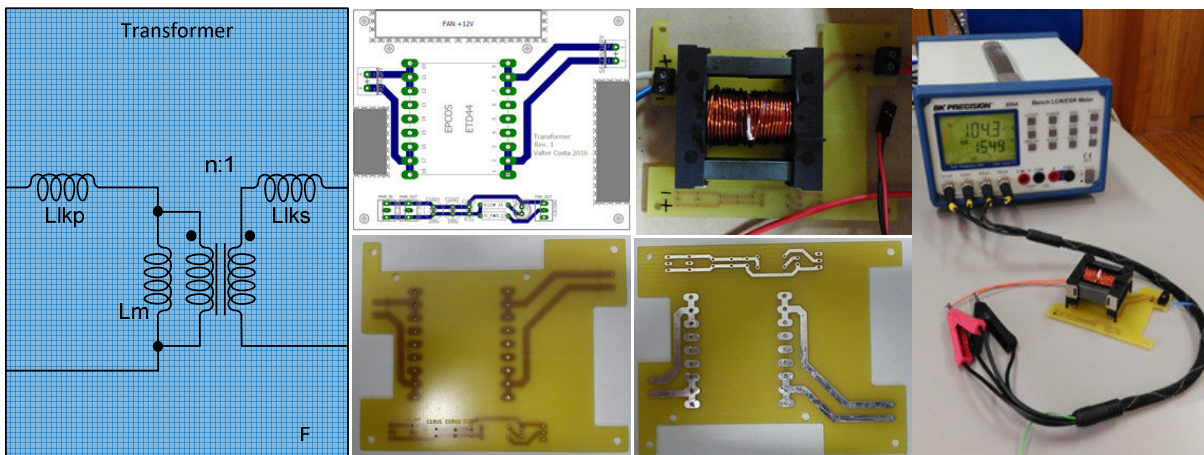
Transformer PCB prototype (100 x 80 mm), Board design; PCB Top and Bottom Layer and PCB full assembly and transformer prototype during experimental tests
